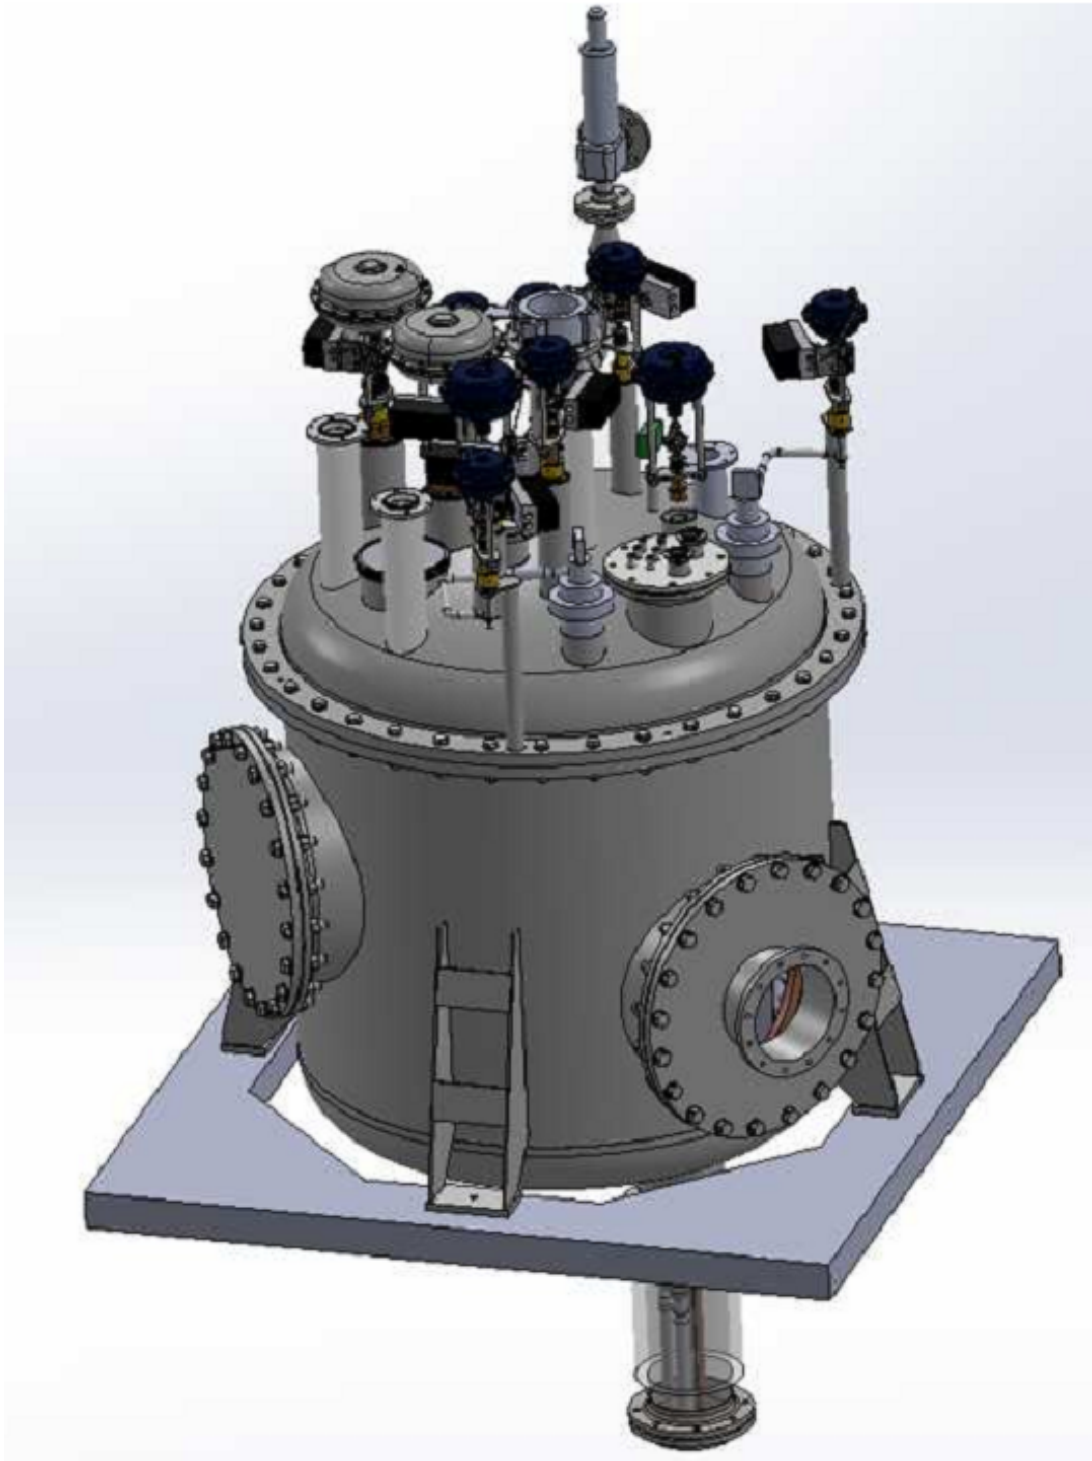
Structural layout of the control Dewar
